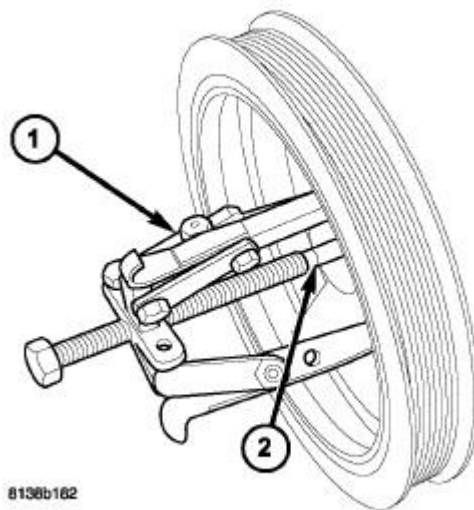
Puller 1023 & Crankshaft Insert 9020
